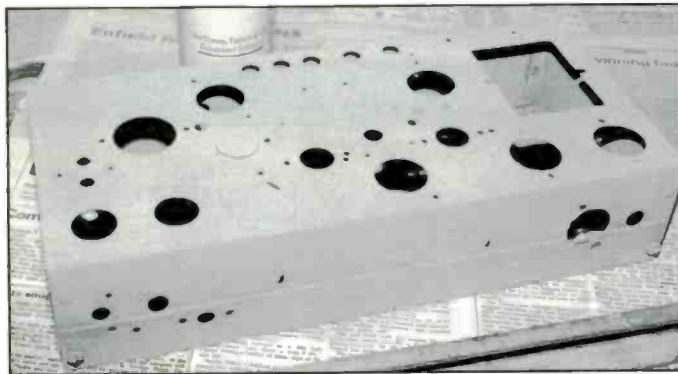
The chassis after the rusted areas have been sanded or repaired. The chassis has been painted using a zinc-bearing paint.
